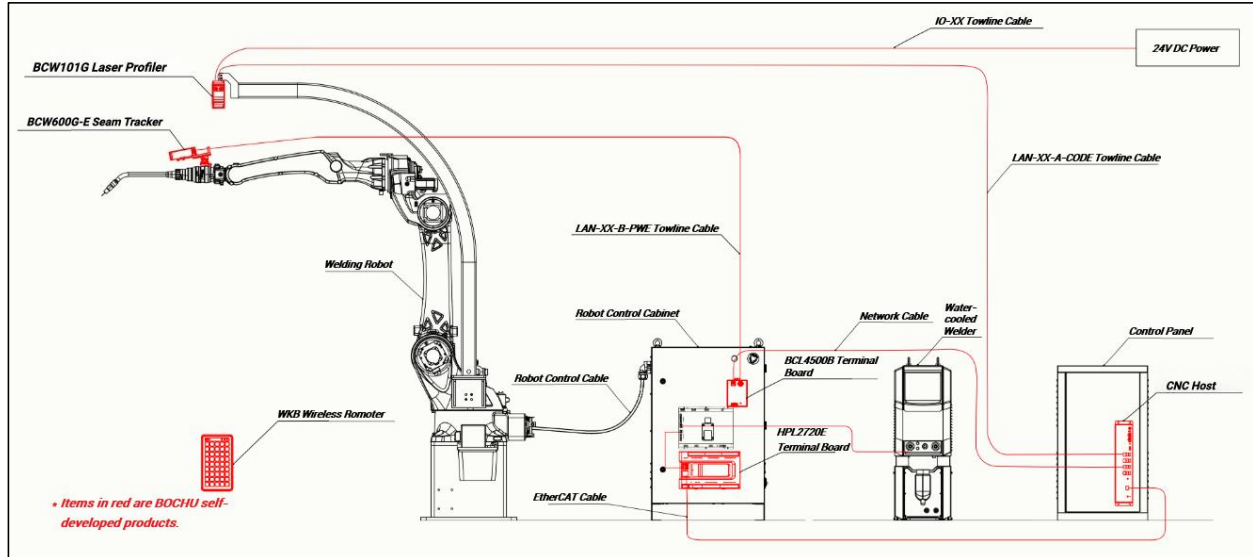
Wiring diagram of BOCHU intelligent welding system
